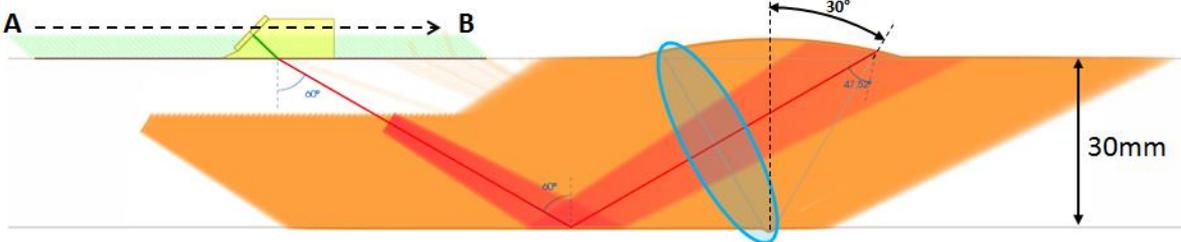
V-weld inspection with a conventional 60° shear waves probe – geometrical zone coverage
